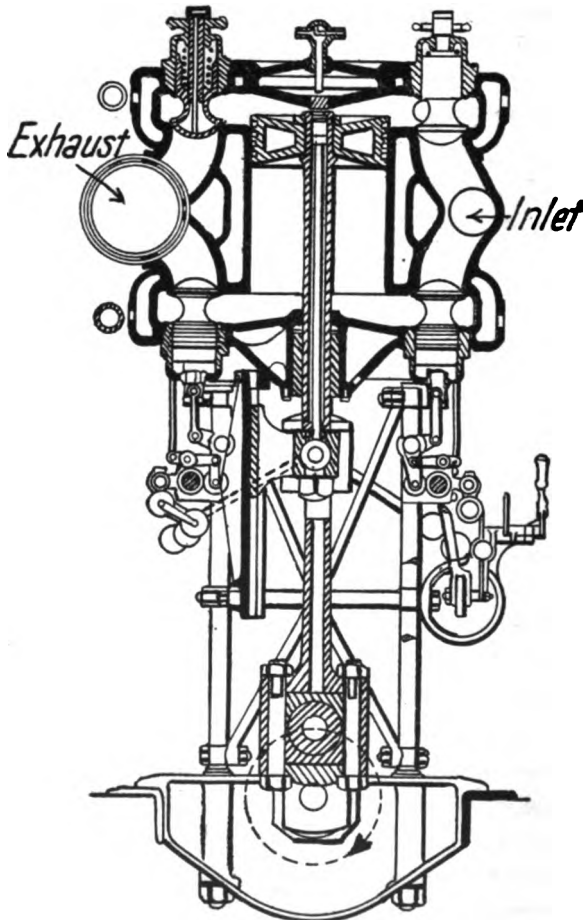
DOUBLE-ACTING FOUR-CYCLE GASOLINE ENGINE.
